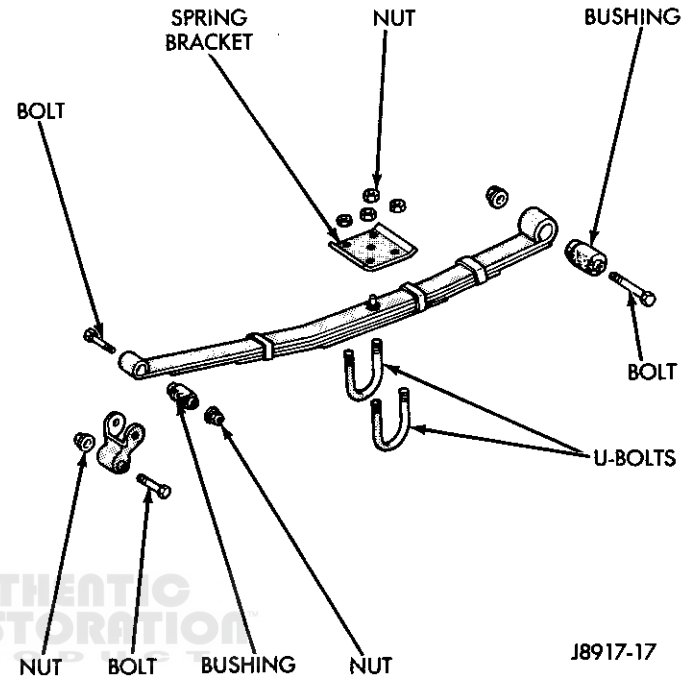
Rear Spring Removal/Installation—XJ Vehicles
